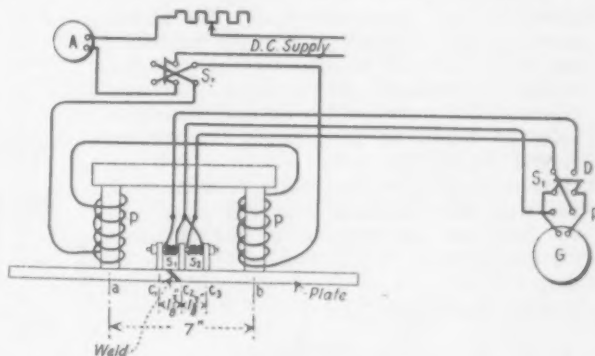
Diagram of Apparatus for Magnetic Tests of Butt-Welded Joints of Steel
